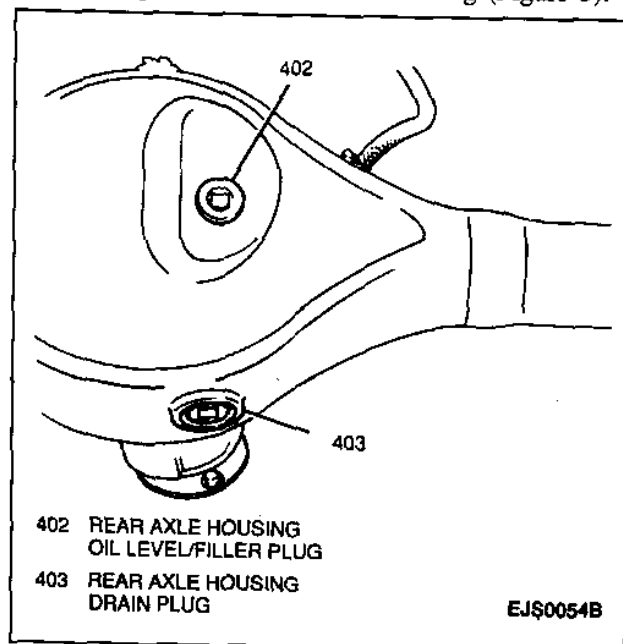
Rear Axle Housing Oil Level/Filler Plug
